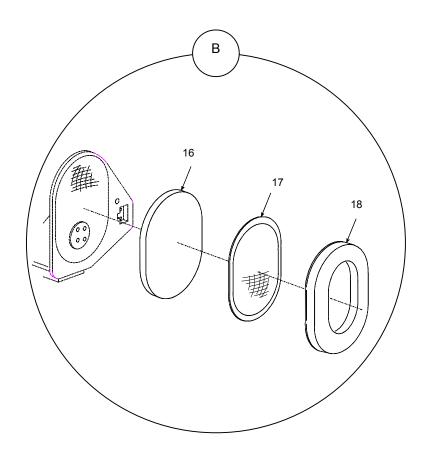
Headset Electrical Assembly H-365/VRC (Sheet 2 of 2)
